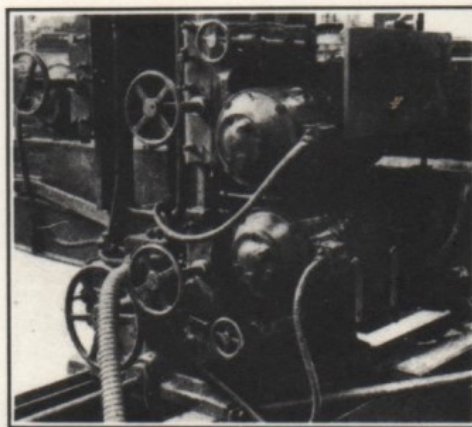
A view of the cutting heads on the double-ended tenoning machine.
